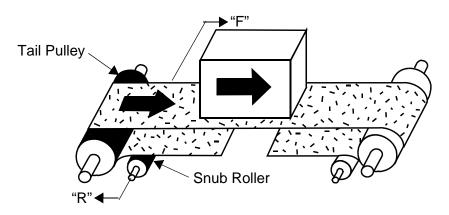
Adjusting the Right Side of the Tail End Snub Roller
